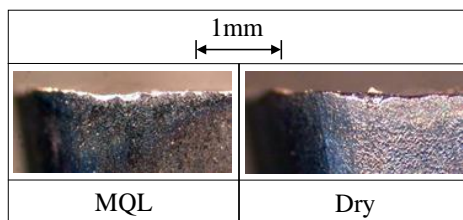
Conditions of maximum flank wear (SCM435, M34, cutting speed: 86 m/min, cutting length of groove: 8 m)
